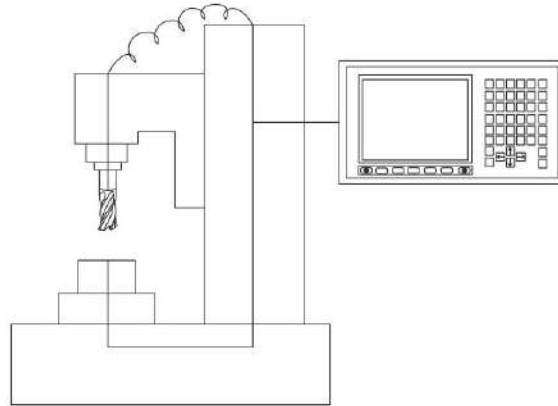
Schematic of a set-up for tool breakage monitoring using current loop through the machine tool
